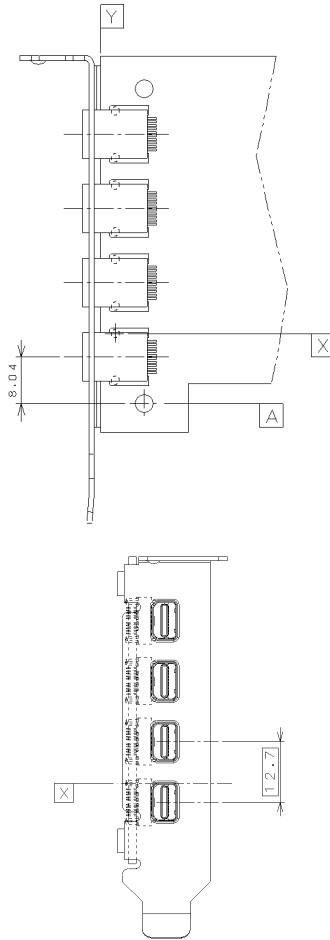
Recommended Mini DisplayPort Connector PCB Contacts and Mounting
